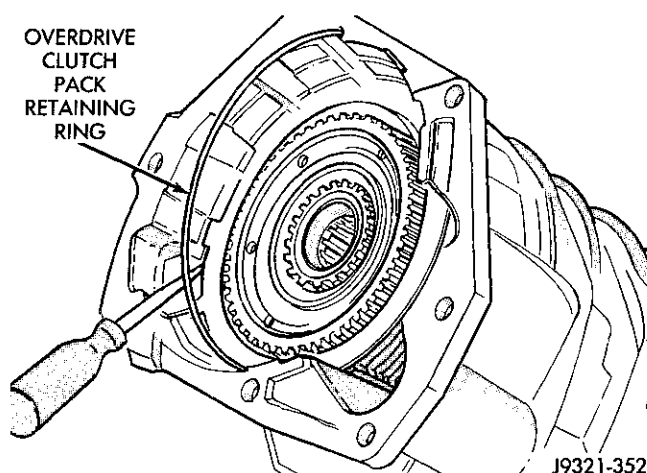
Removing Overdrive Clutch Pack Retaining Ring
